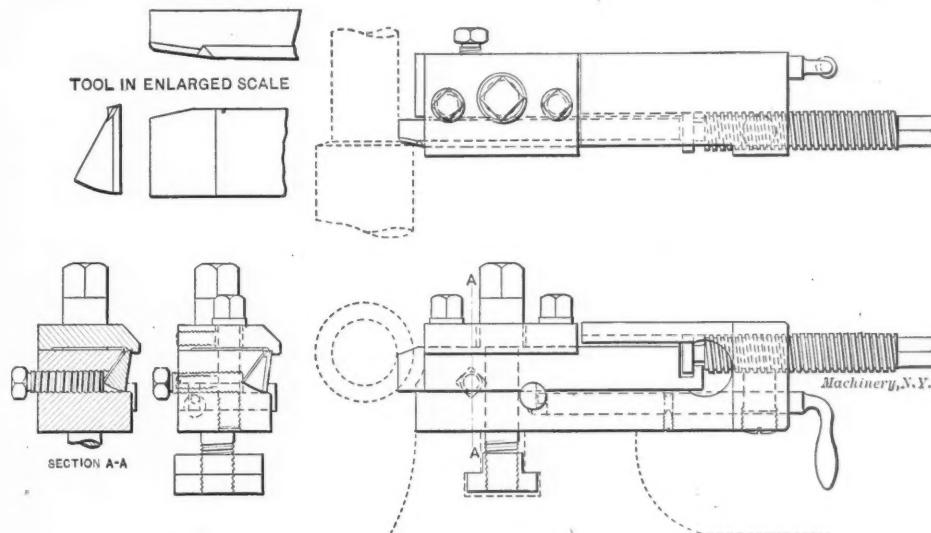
Holder for No-clearance Tool when used in the Engine Lathe.
